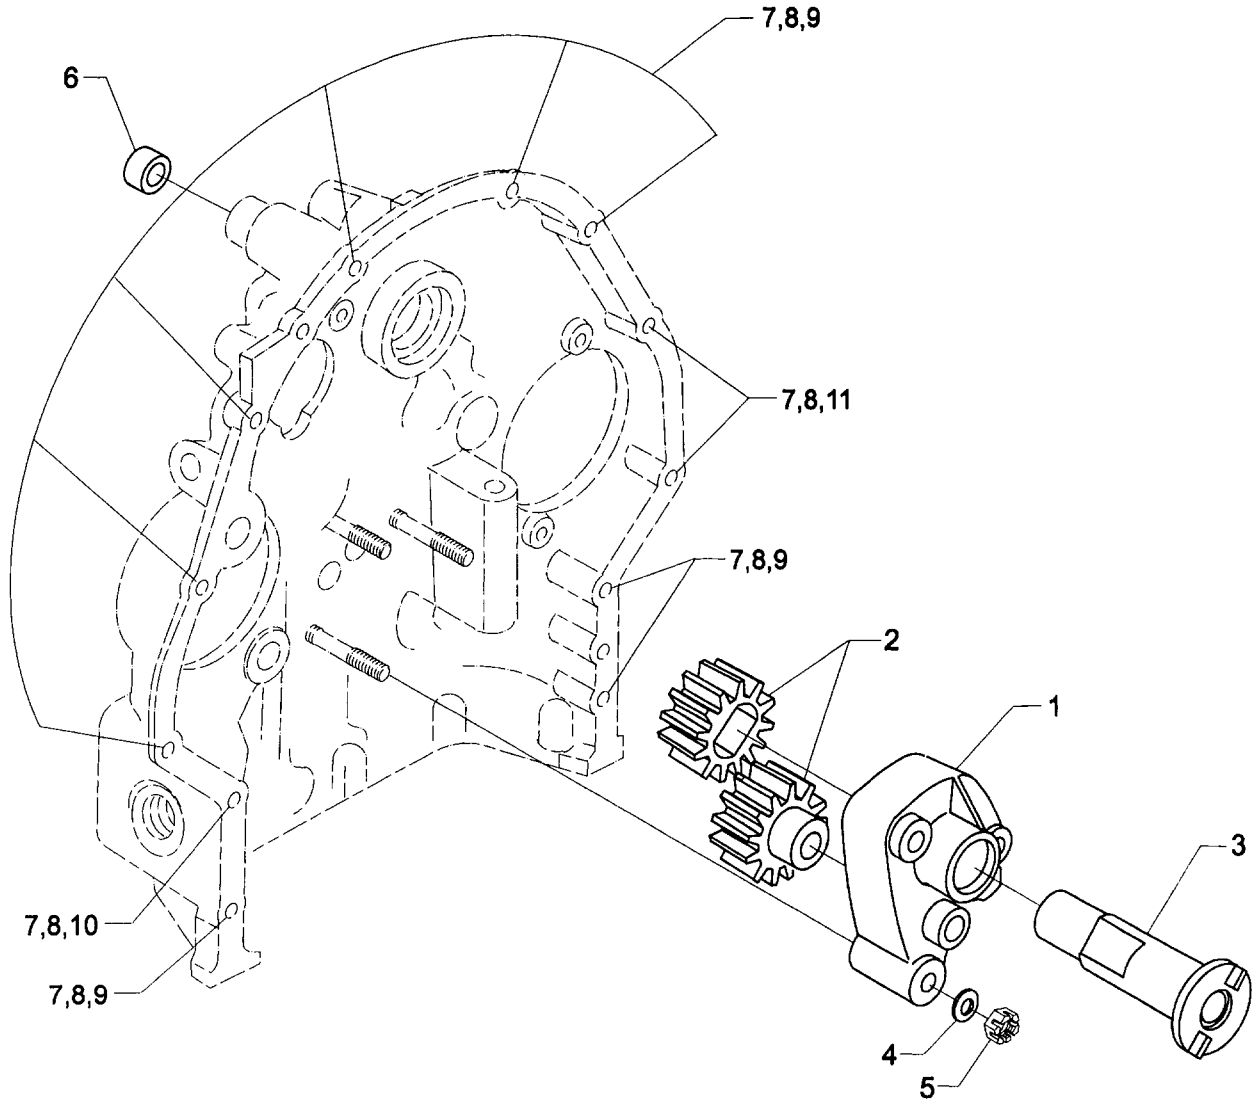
OIL PUMP AND ACCESSORY HOUSING ATTACHING PARTS
